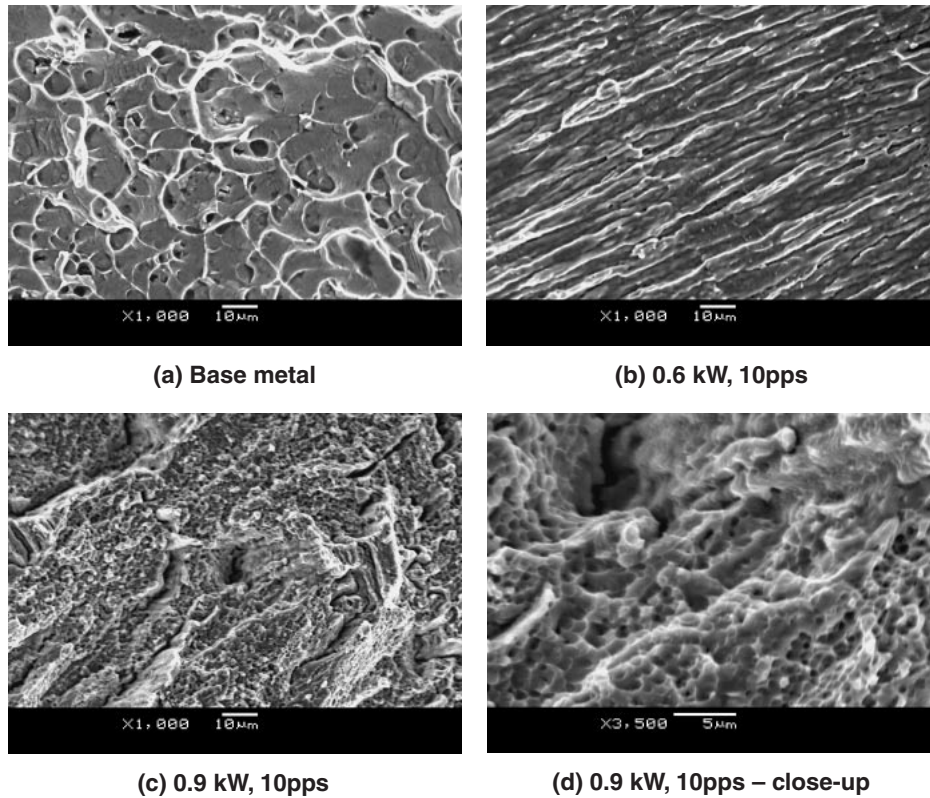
Fracture surfaces of tensile specimens.
